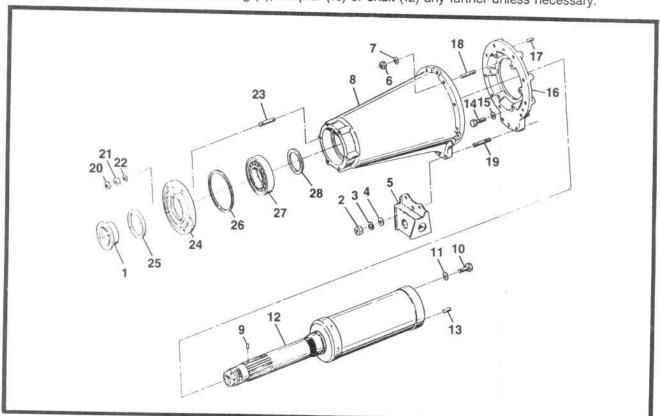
C. CRANKCASE AND CRANKSHAFT EXTENSION (IO-470-P).
